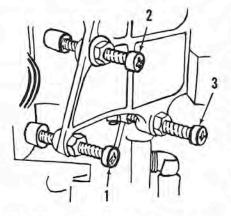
B — View of stop bracket showing location of throttle stop screws.
